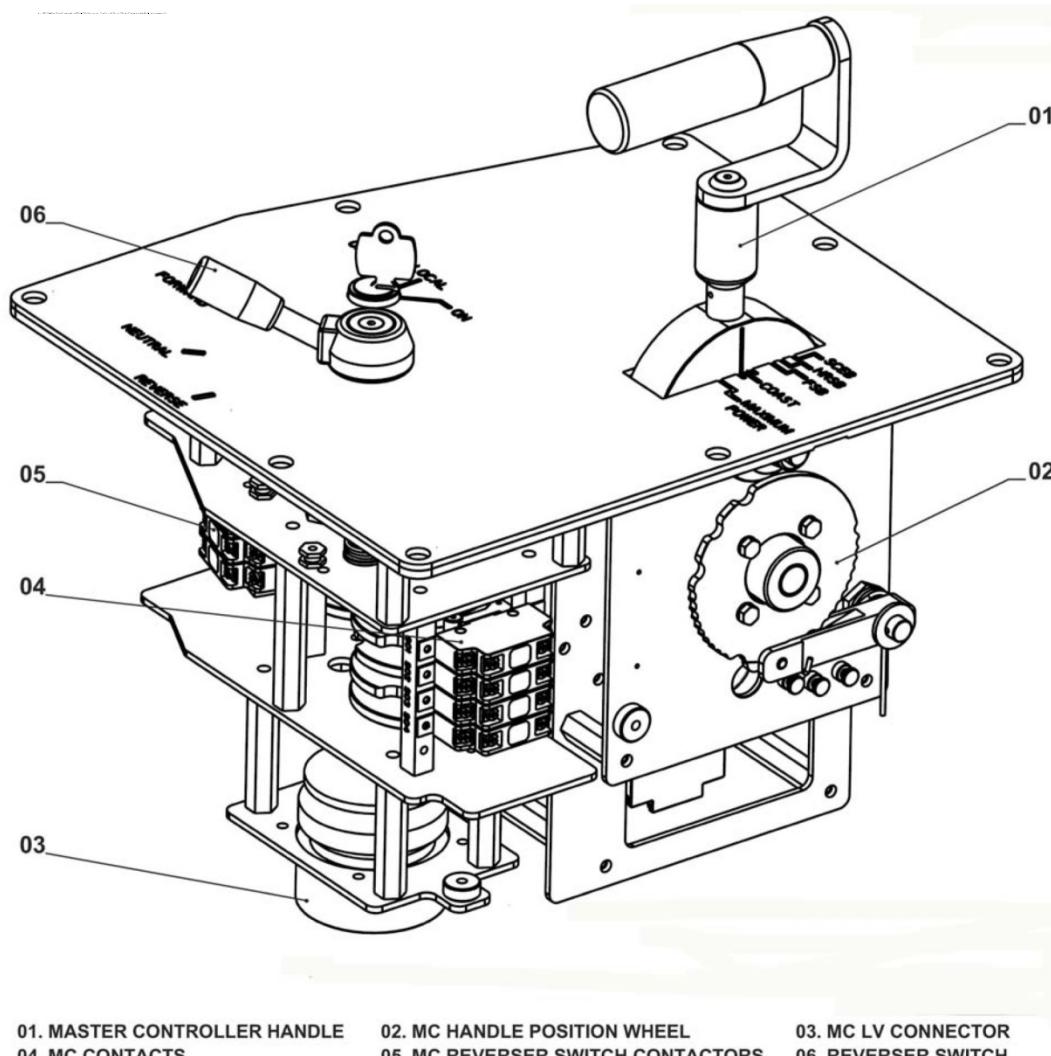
I-02.37 Master Controller Gears - Internal View (2/2)
